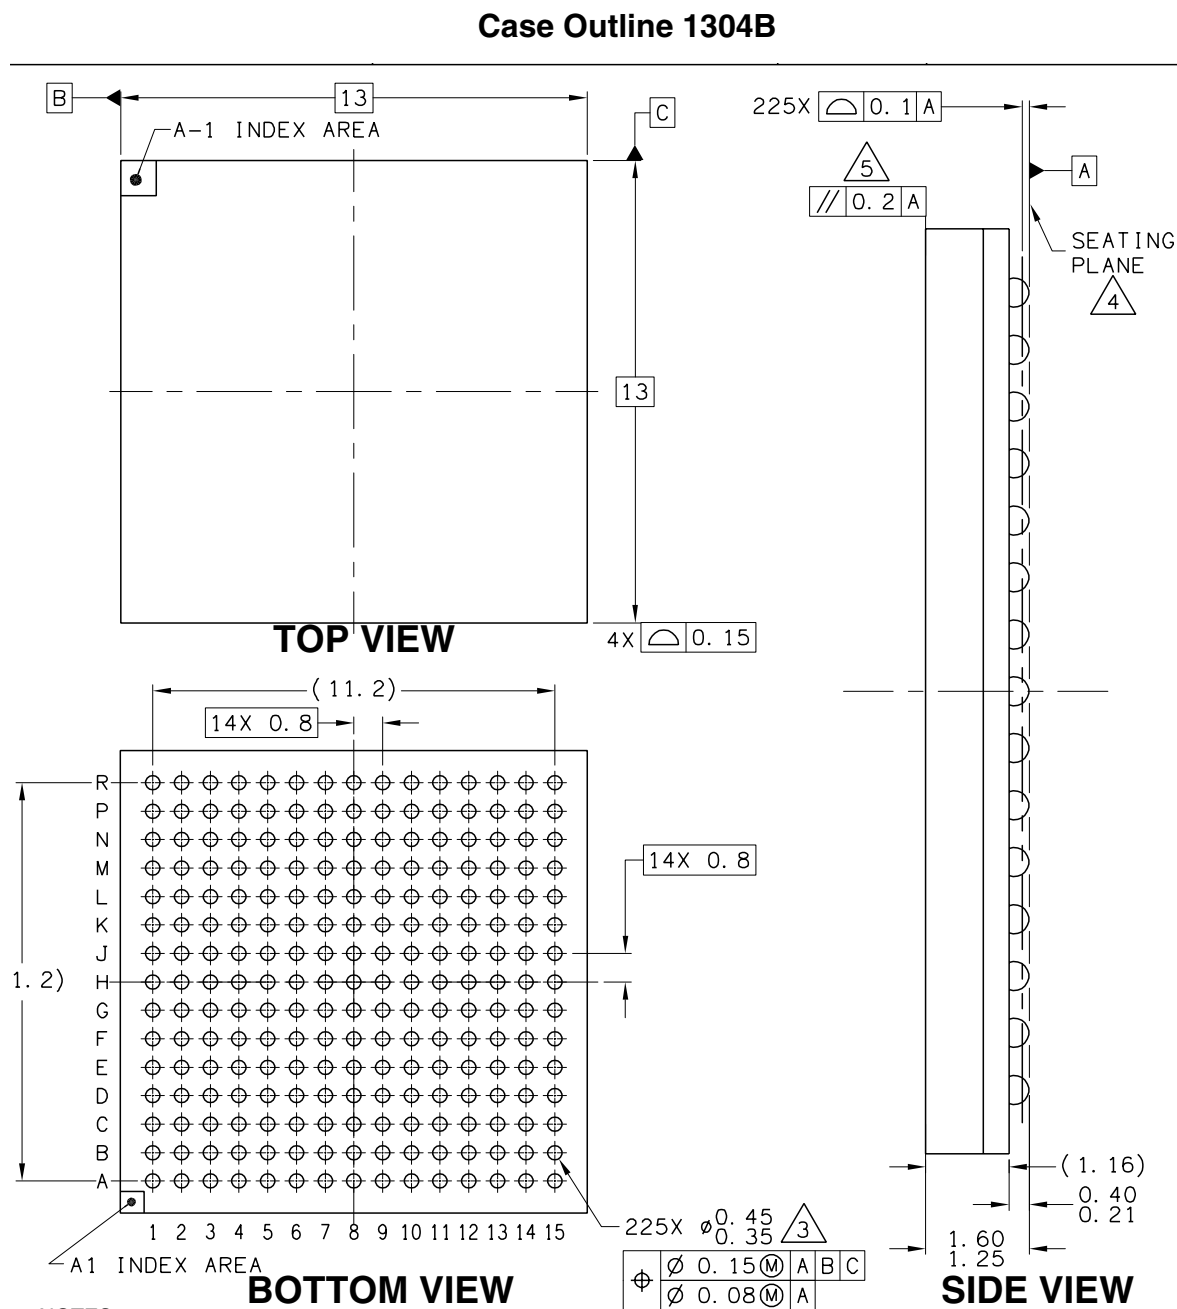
i.MX Processor's 225 PBGA Mechanical Drawing
